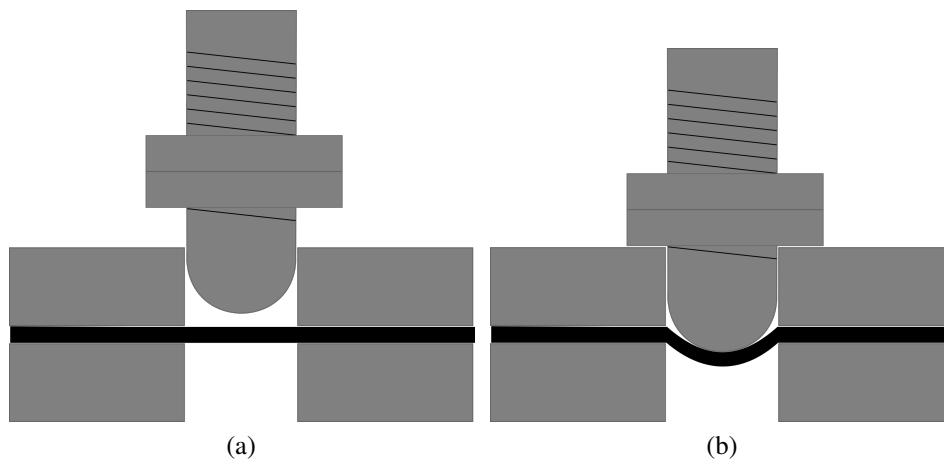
(a) A diagrammatic cross-section showing the dimple indentation process. The thin copper beryllium sheet, shown in black, is held between two thick steel forming plates, shown in grey. Holes in the forming plates allow a rounded indenter to be located at the required dimple location. (b) Two nuts are locked together on the threaded shaft of the indenter to form a collar which limits the depth that the indenter can be inserted and thus controls the dimple depth.
